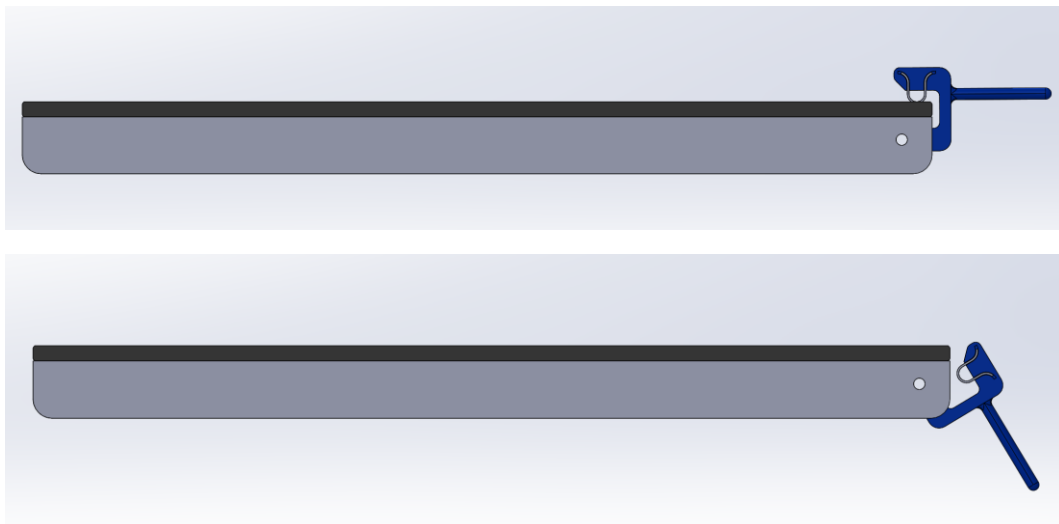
Mechanism engaged (top) and disengaged (bottom)
